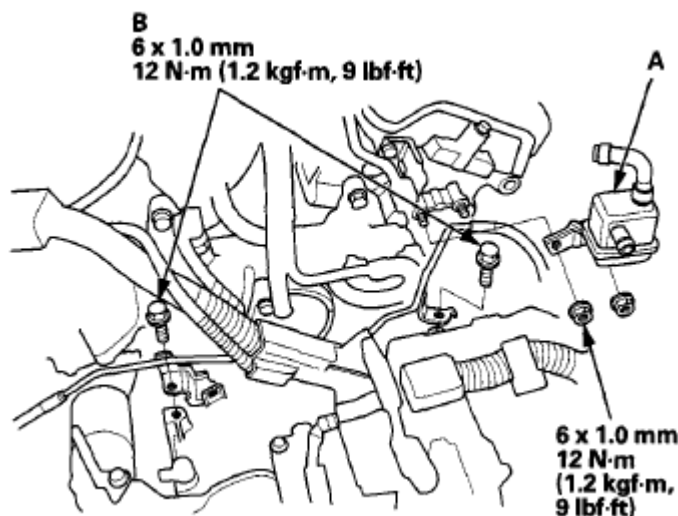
Removing EVAP Canister Purge Joint With Torque Specifications
